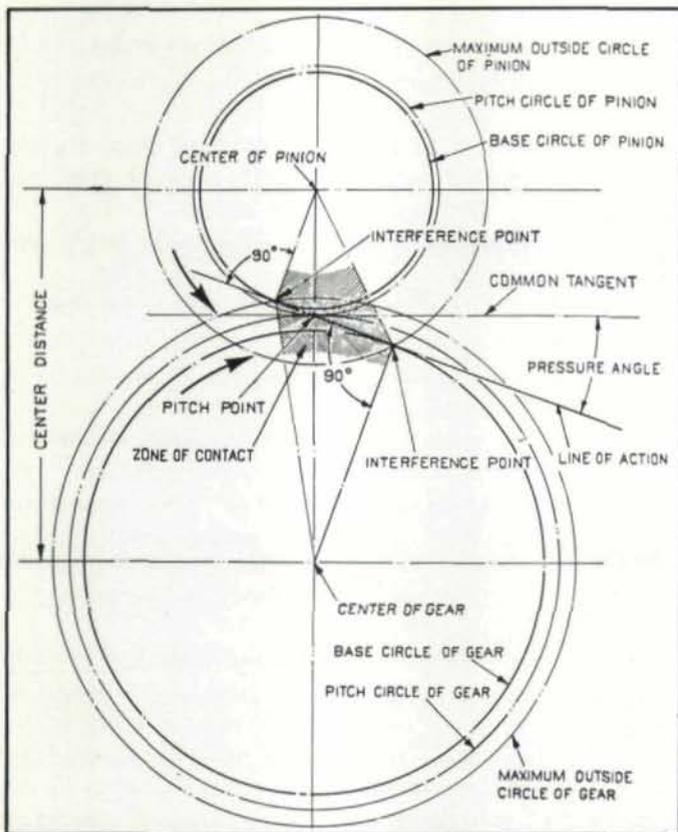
Diagram Presenting Principal Boundary Surfaces of Gear and Pinion, Showing Maximum Permissible Outside Diameters to Avoid Involute Interference.
